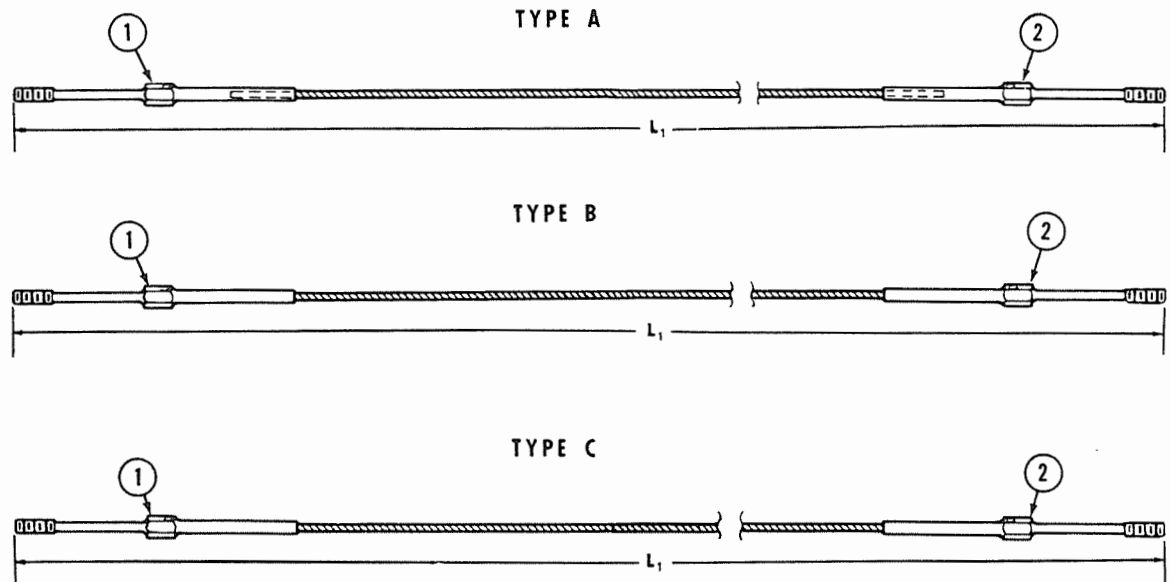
(Sheet 4 of 4 Sheets). Aileron Trim Control System – Trim Tab Drive Mechanism, Cable Chart and Cable Assemblies
